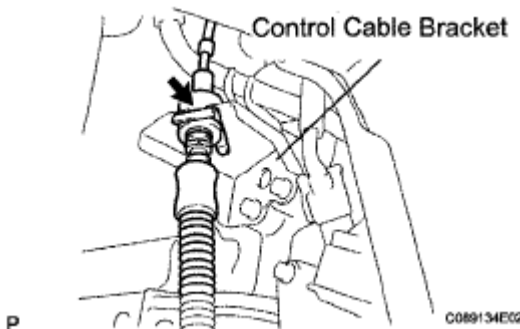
Identifying Transmission Control Cable Assembly Clip
